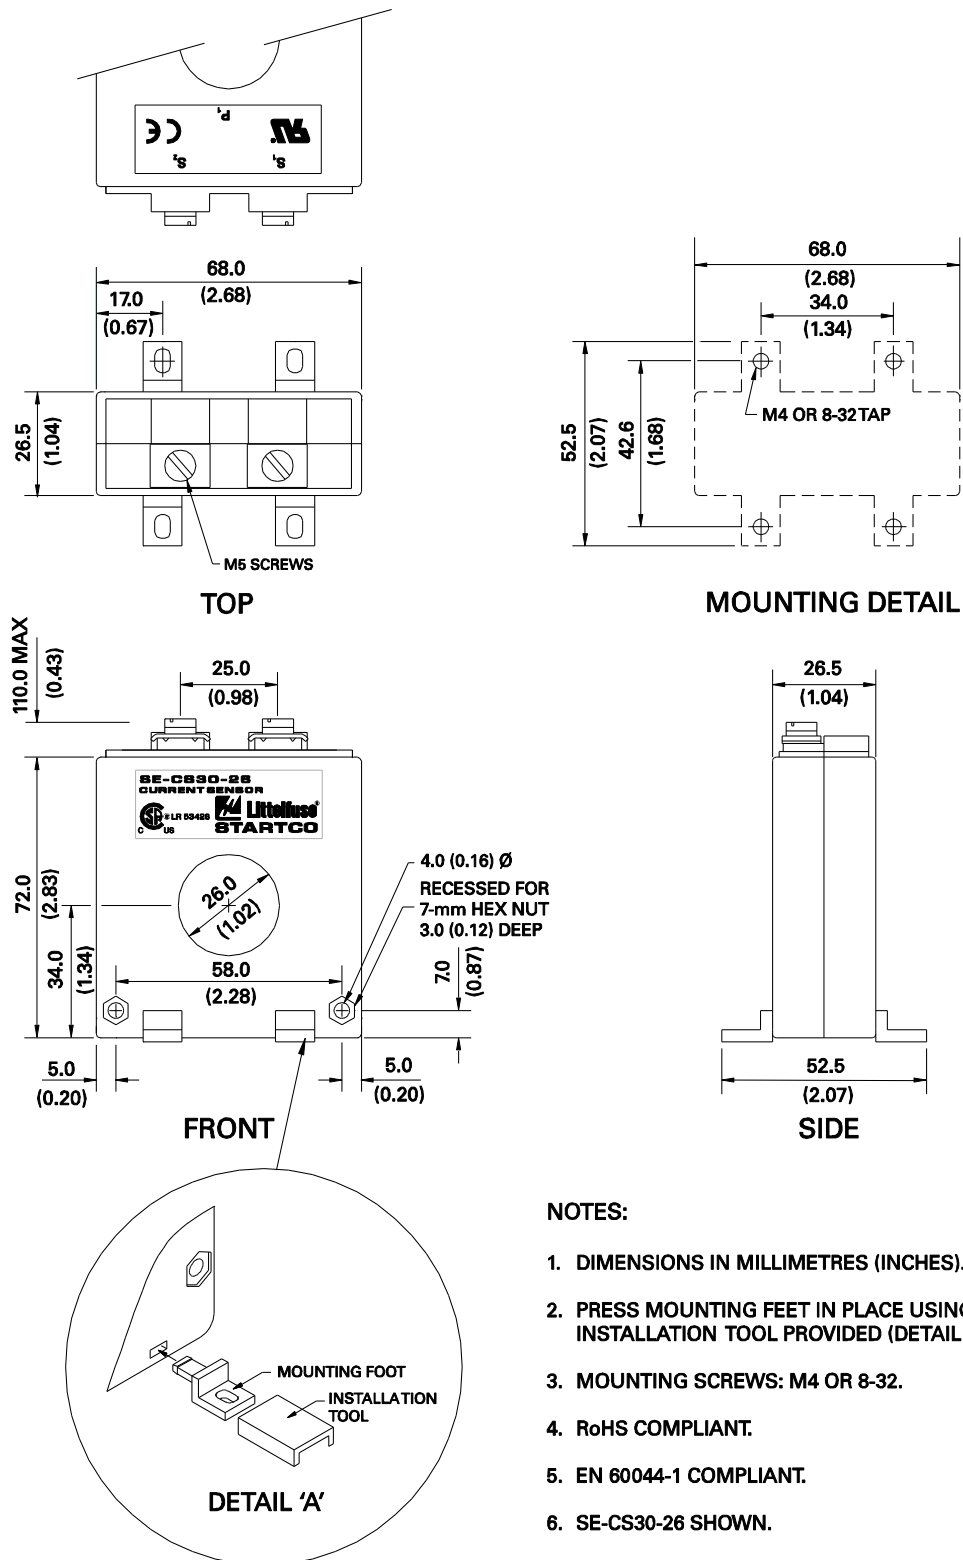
EFCT-26 and SE-CS30-26 Outline and Mounting Details.
